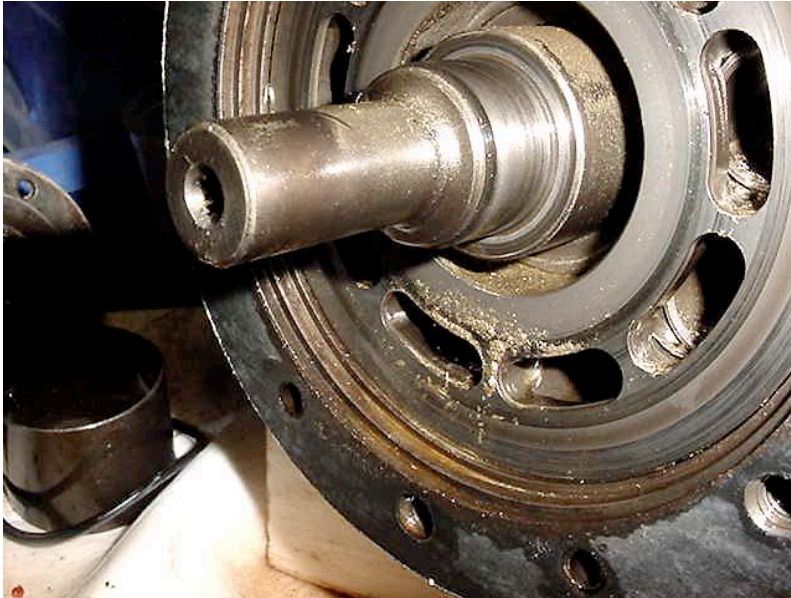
Failed NY Airbrake Fuel Pump with copper debris
